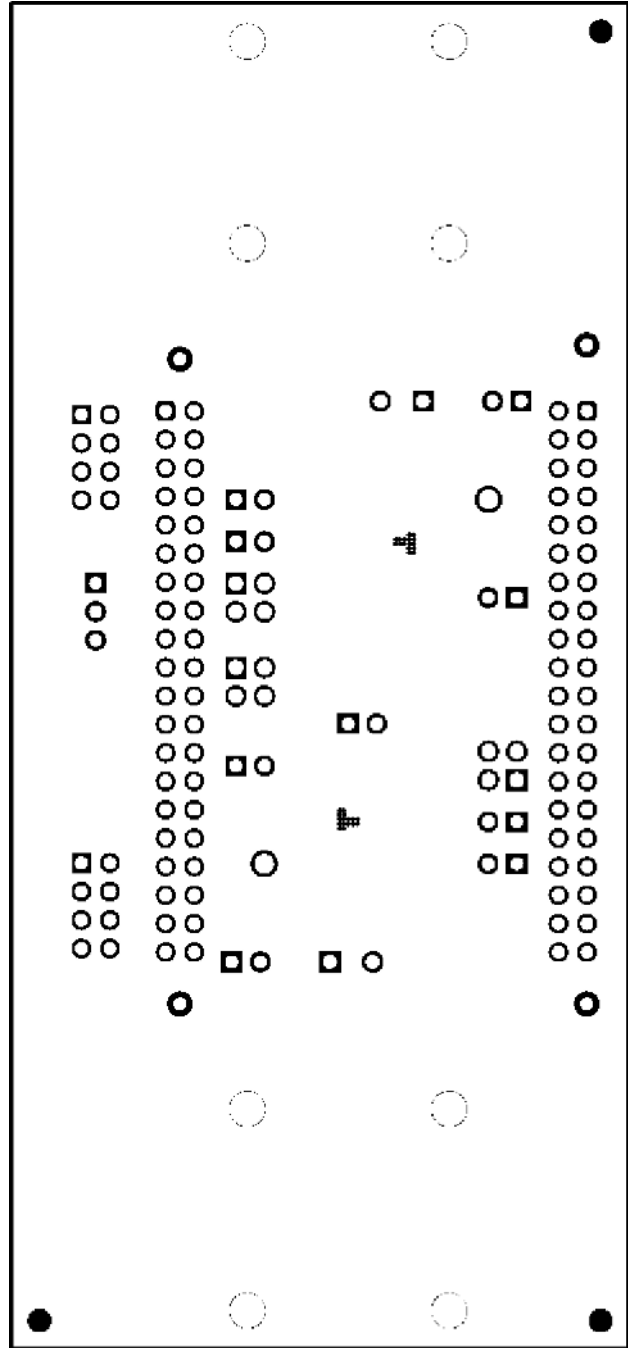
TAS2563YBGEVM-DC Bottom Solder
